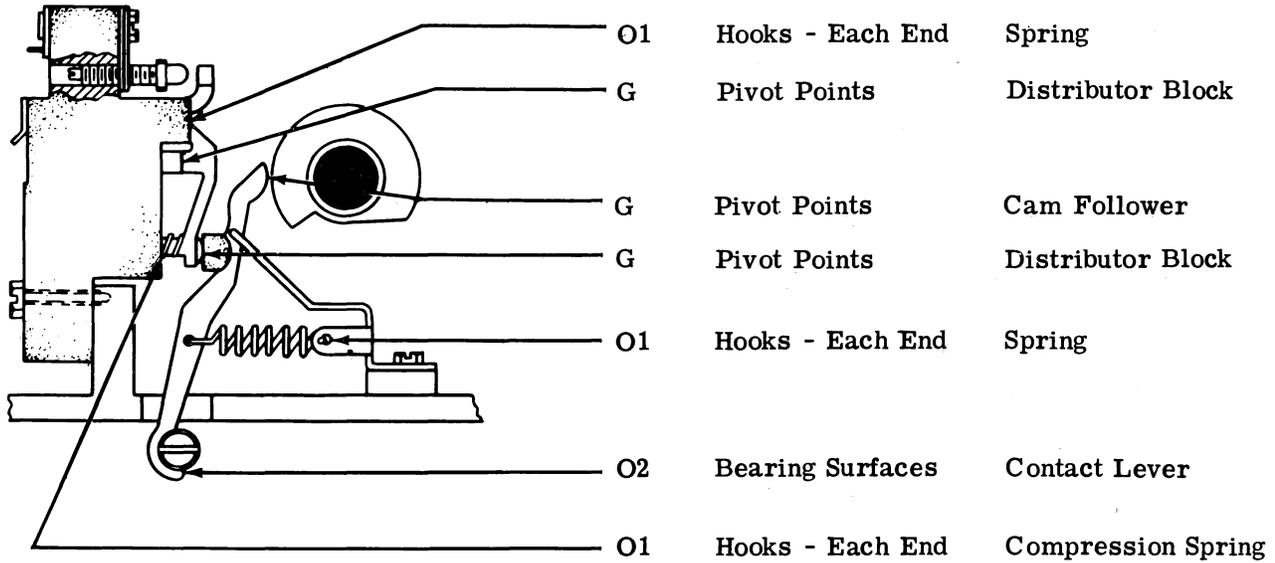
Typical Late Design 5-Level 28 Multiple Wire Distributor
